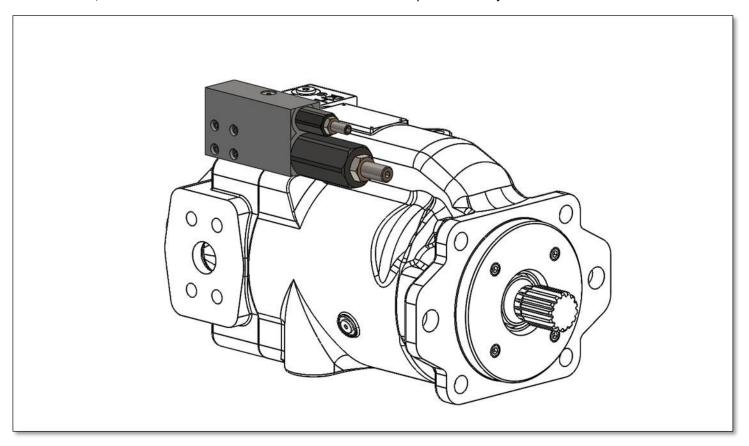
Control Block, Mounted to the Pump Housing (PC/LS Control Shown)
